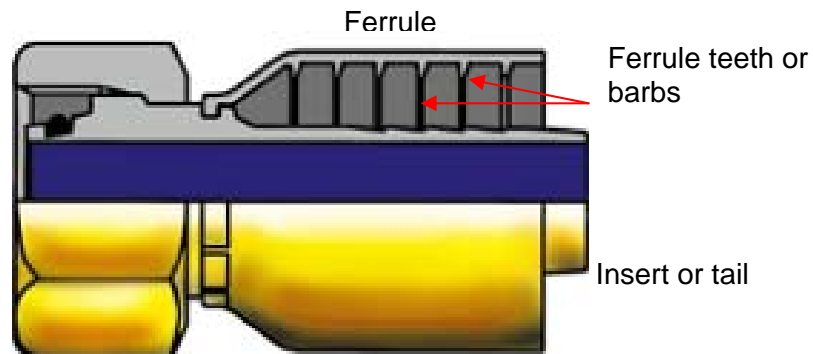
A one piece, crimp type (permanent) hose fitting. The two parts of the fitting, (ferrule and insert) have been pre-assembled to form the one piece fitting prior to assembly onto a hose. In many instances these two components remain separate which increases the variation / matching possibilities. Greater care has to be taken with the two-piece when assembling to ensure that the two parts correctly latch together
